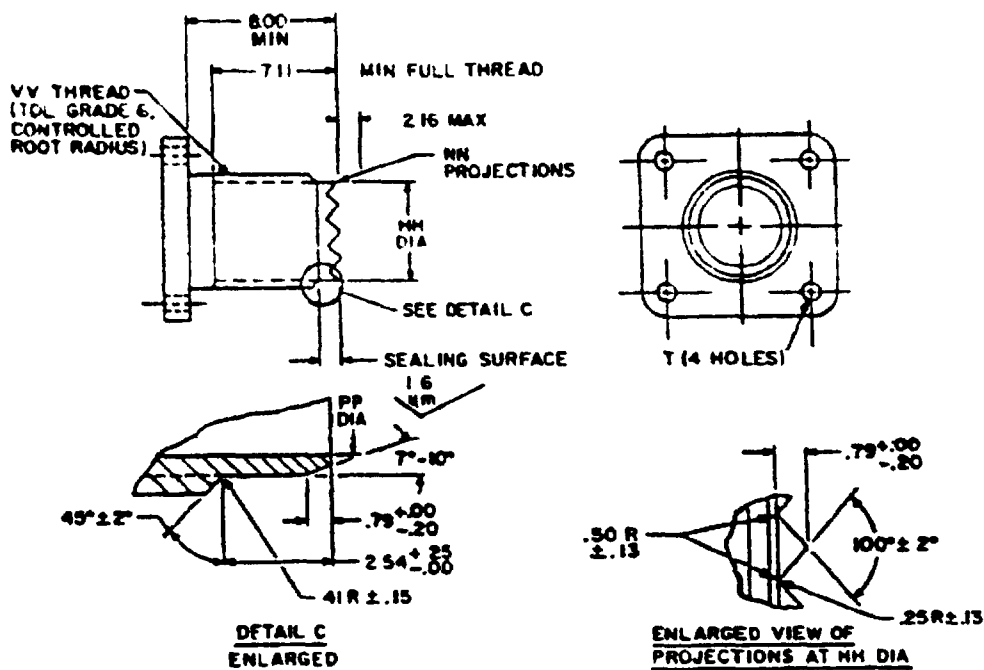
Dummy connector test fixture dimensions for MIL-C-38999 (Series III and IV).
